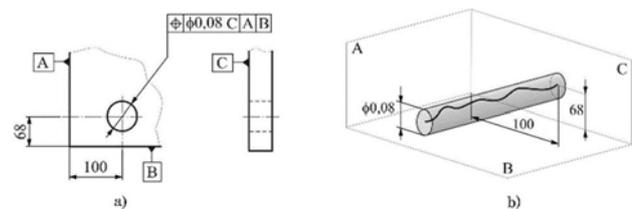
Example of tolerance of position: a) drawing example b) tolerance zone
